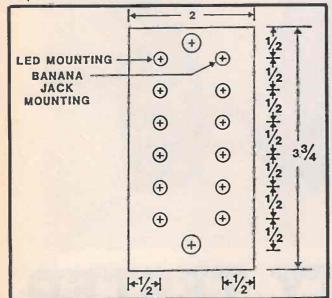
Cover the front panel with masking tape and mark out all holes to be drilled. It's best to drill these small holes in a block of wood to check for a correct fit before drilling the metal plate. All measurements are in inches.
